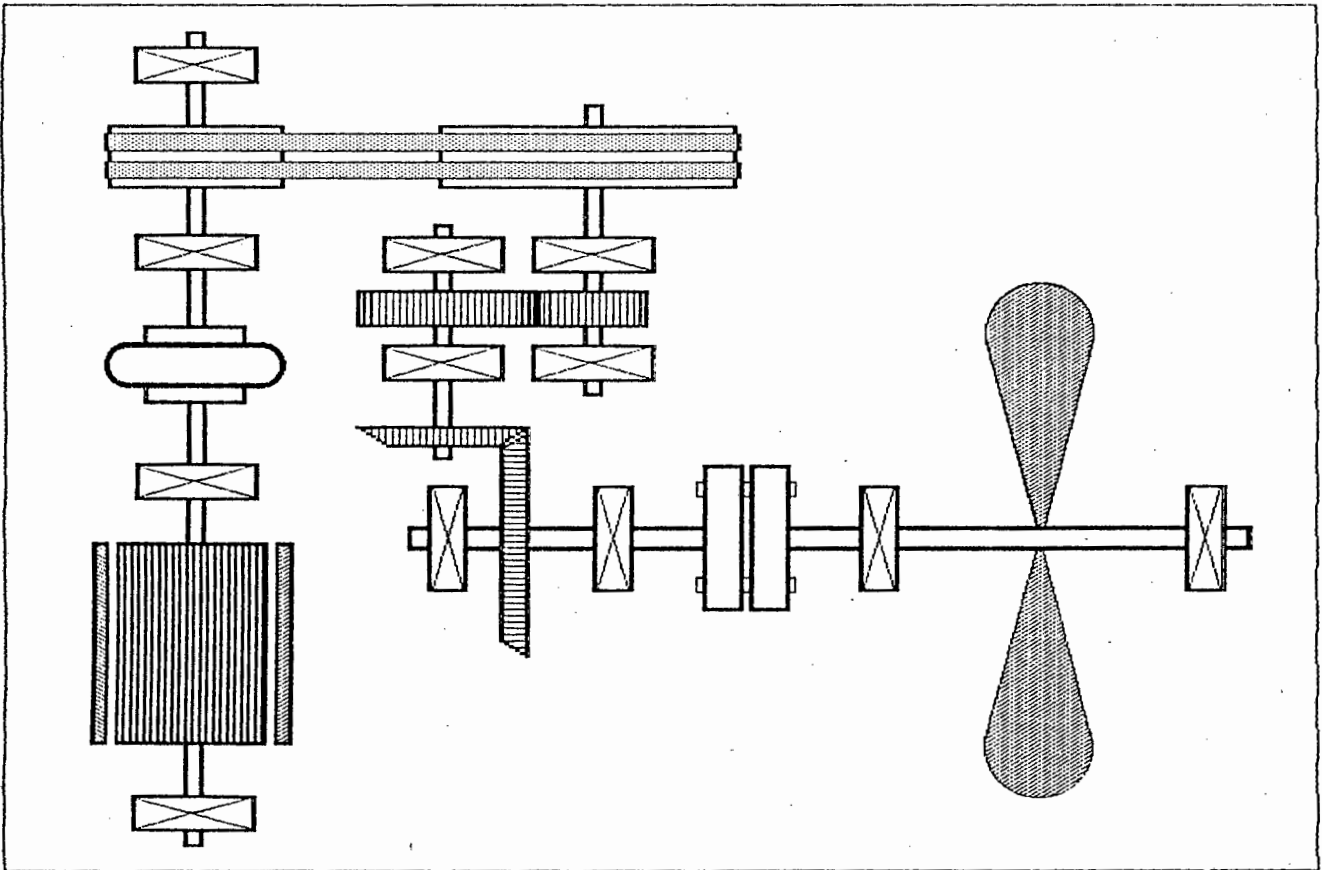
SCHEMATIC ILLUSTRATION OF A TYPICAL INDUSTRIAL MACHINE
